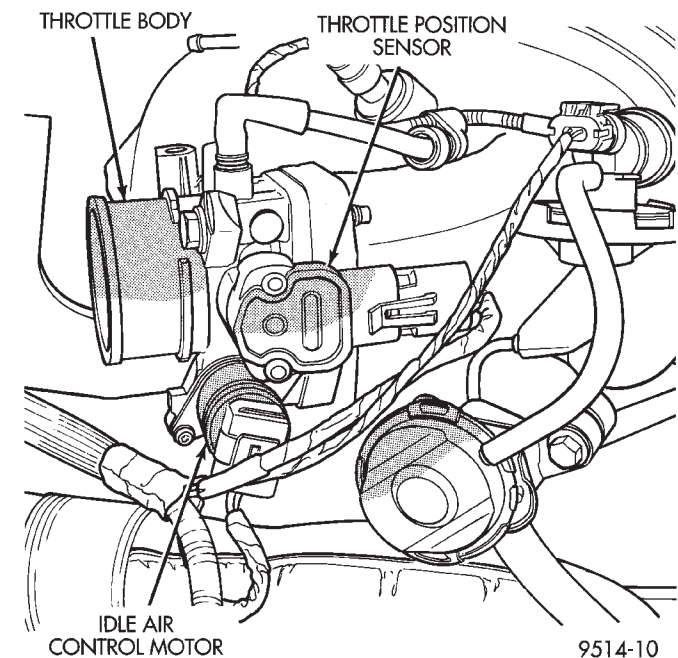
Electrical and Vacuum Connection to Throttle Body
